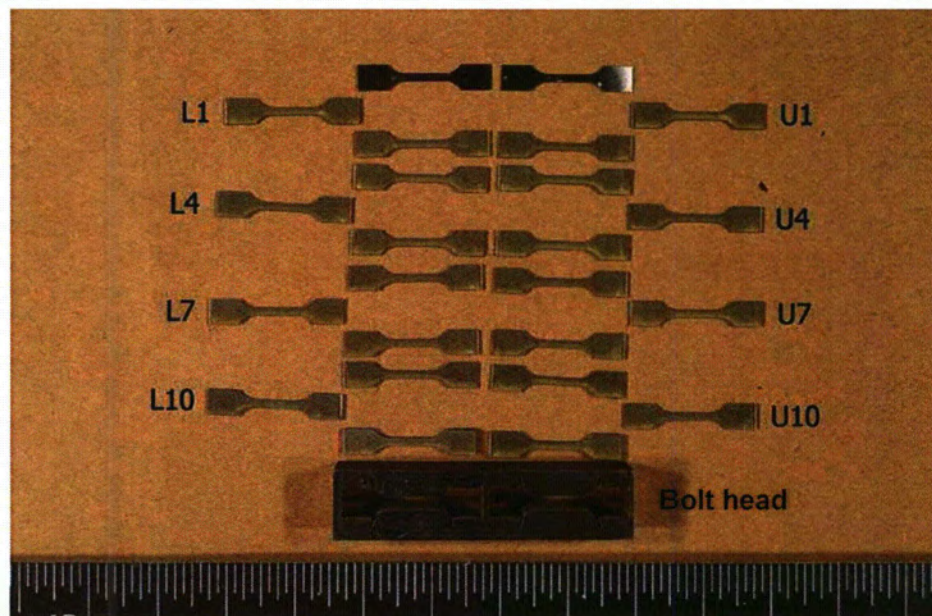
Typical location of tensile specimens machined from each bolt. The IDs of the tested specimens are shown.
